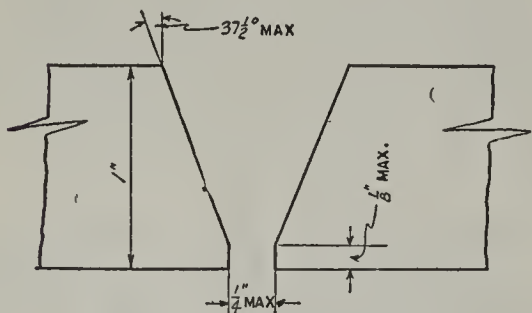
(b)—Alternate Butt Joint for Plate 1 In. Thick (May be Used for the Oxyacetylene Process Only)
